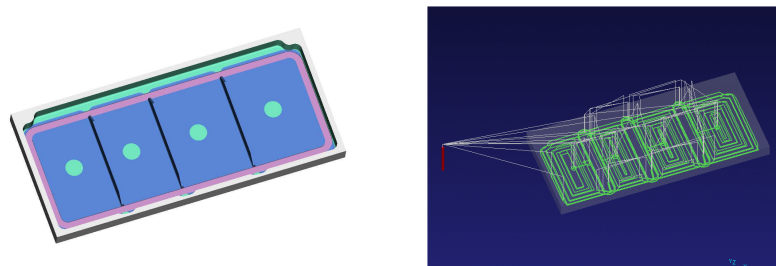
G-code converter: machining path (G-code) converted to material removal geometry.
